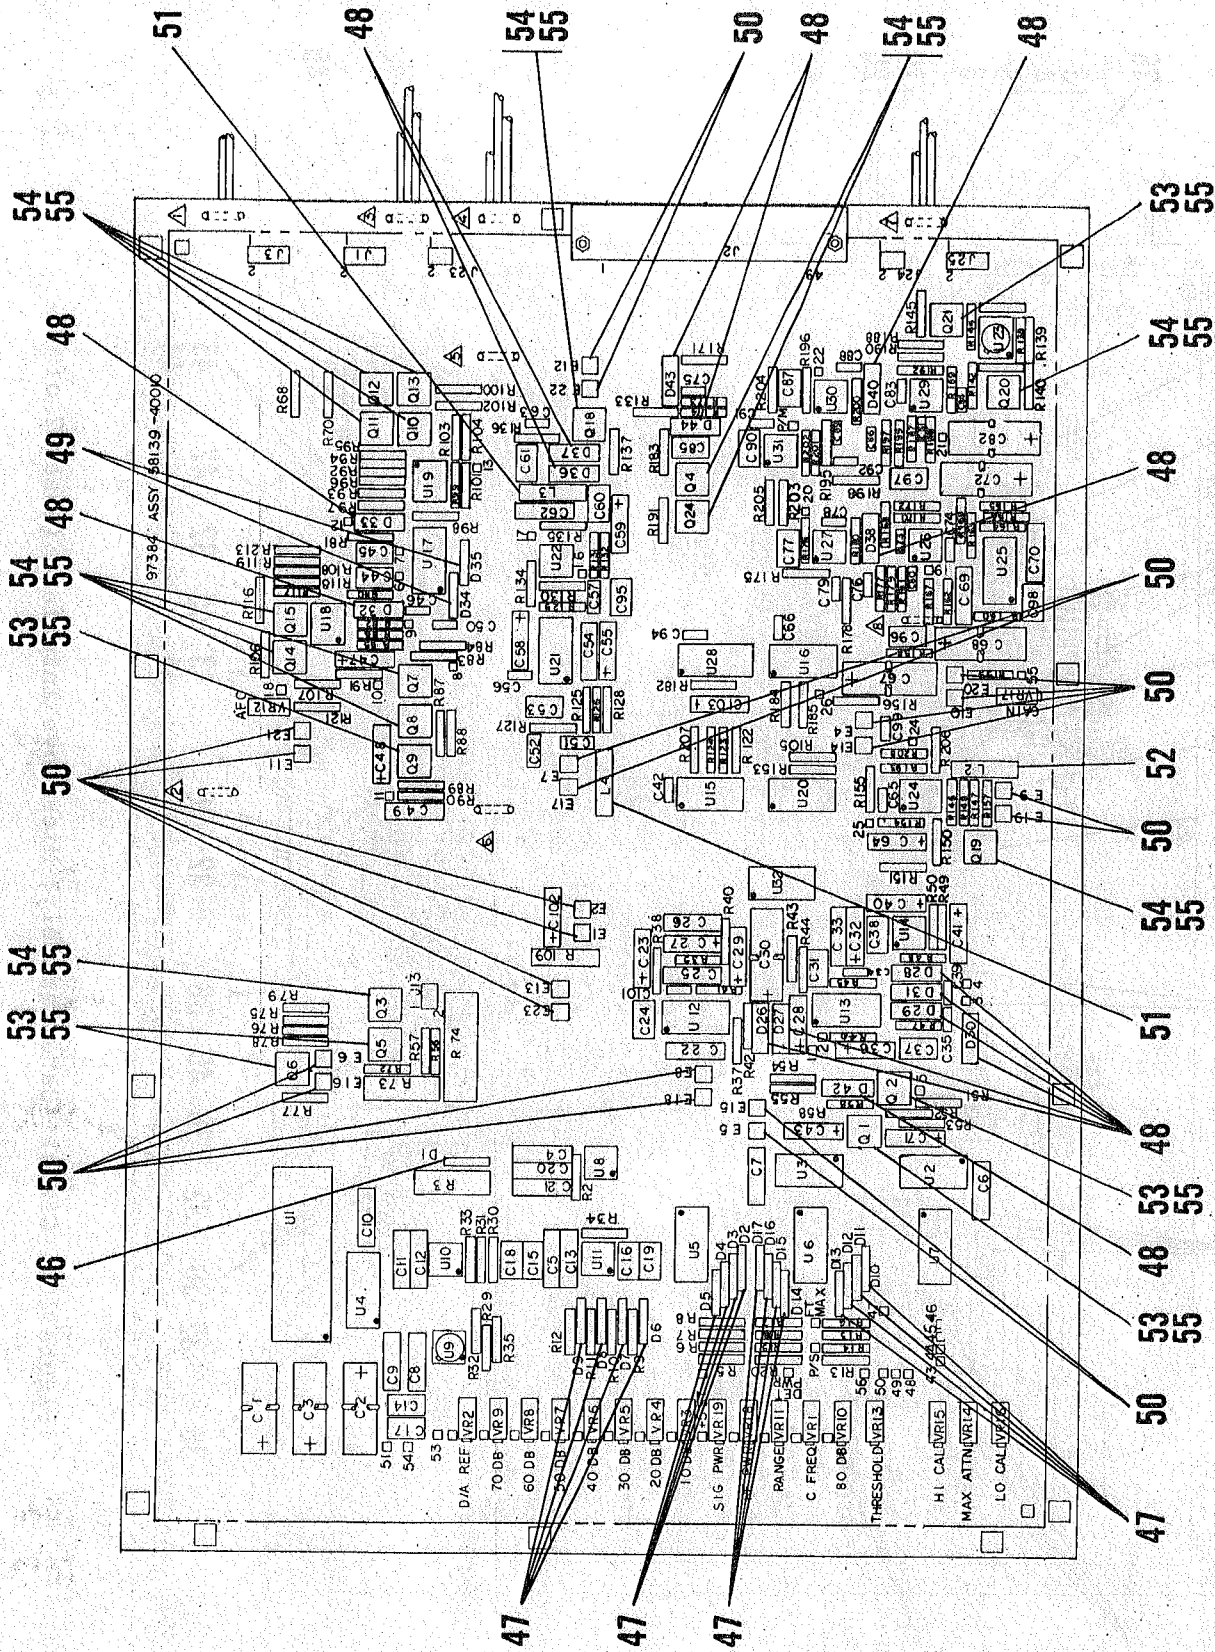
Circuit Card Assembly, Microwave Interface (Sheet 3 of 7)
